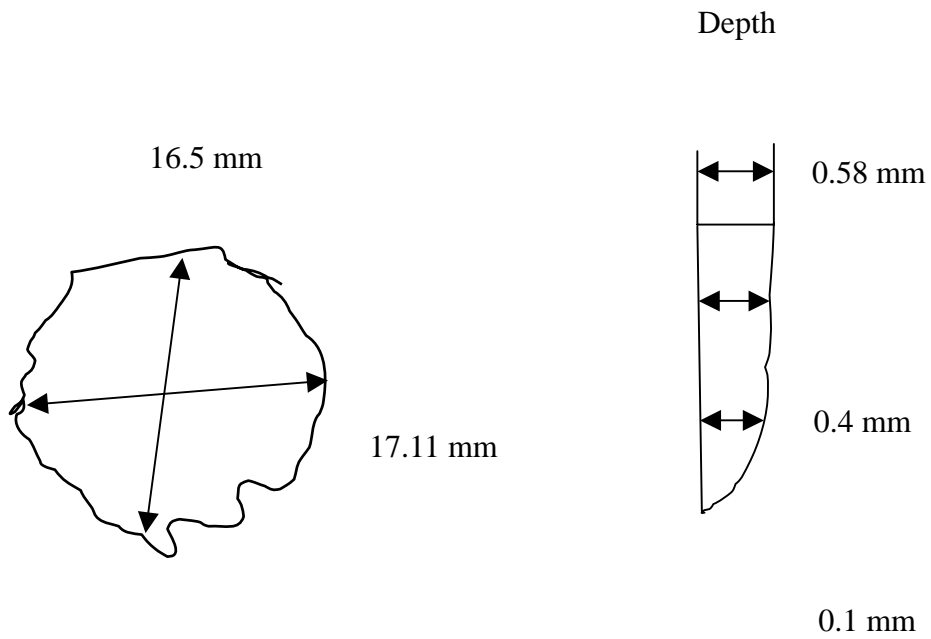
Sketch of #2 corrosion pit dimensional measurement.
